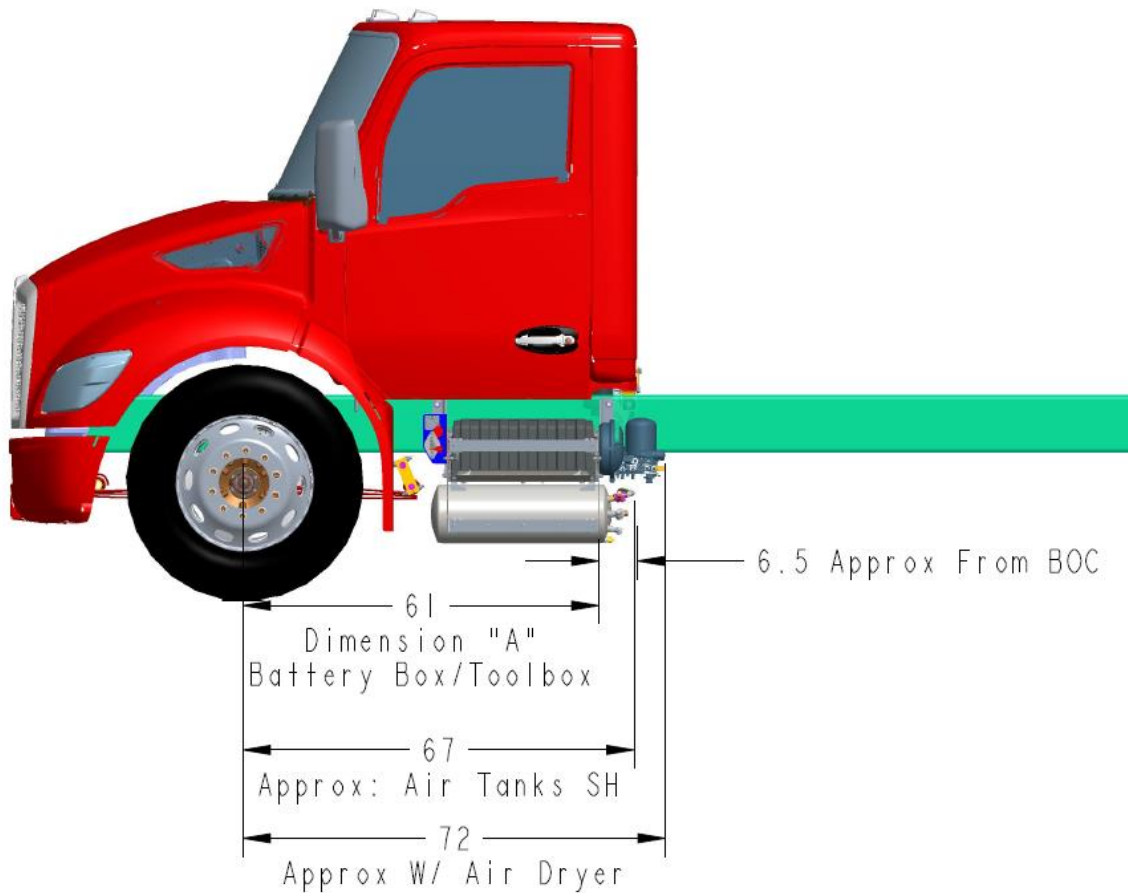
Dimension "A" on SH, LH Batter/Toolbox
